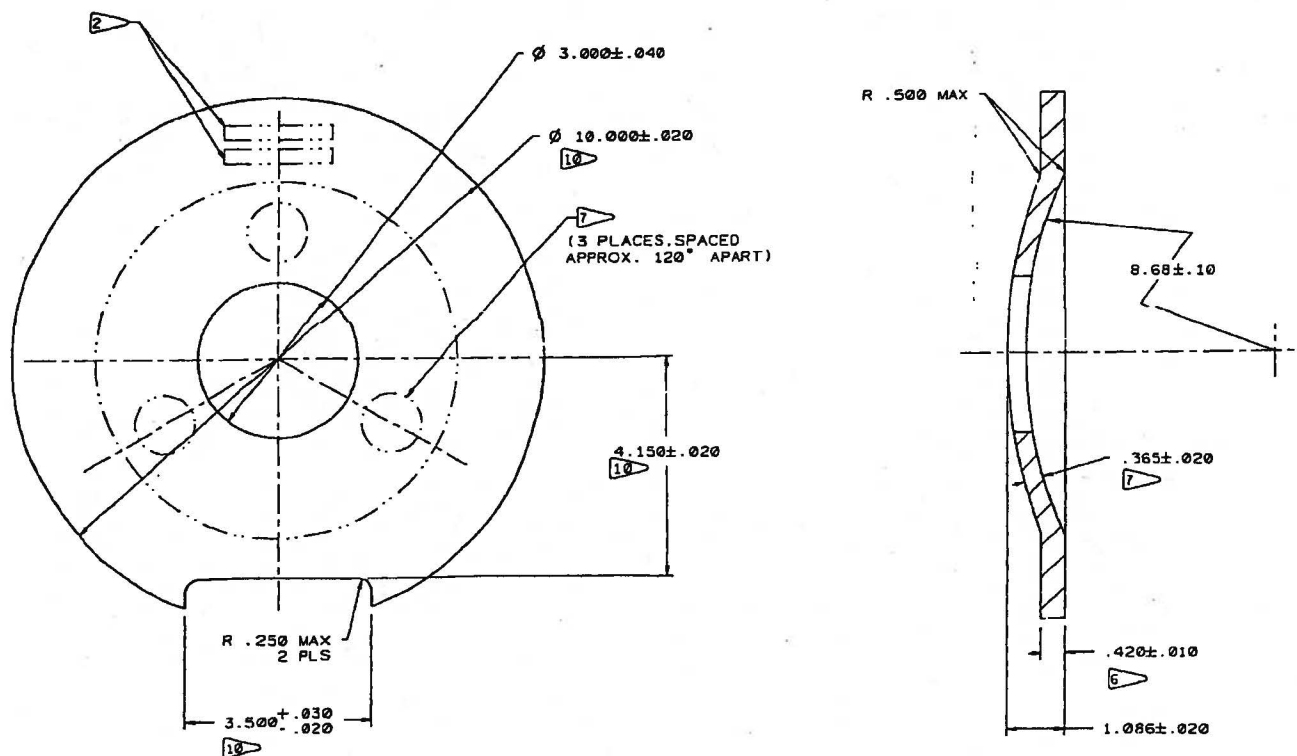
Portion of engineering drawing AY321889 showing Pad A.
